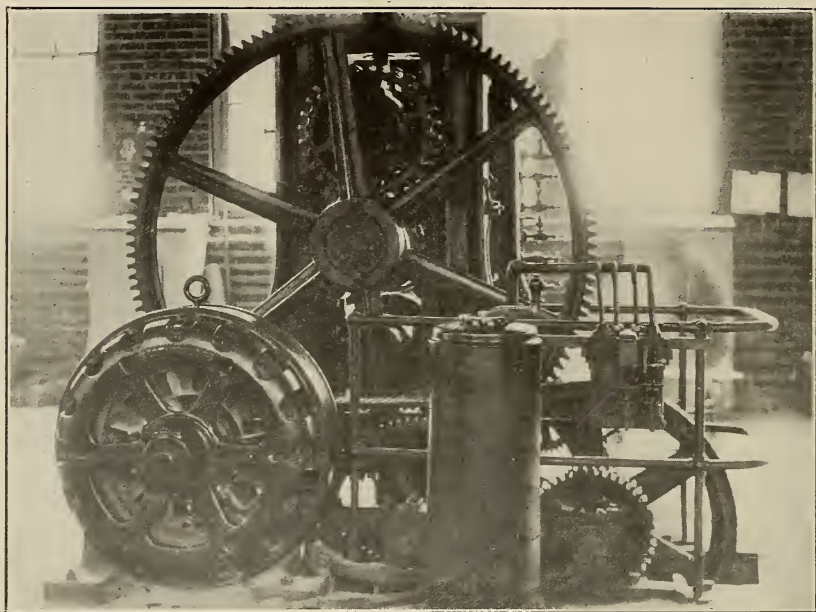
WESTINGHOUSE MOTOR DRIVEN CALENDER.
